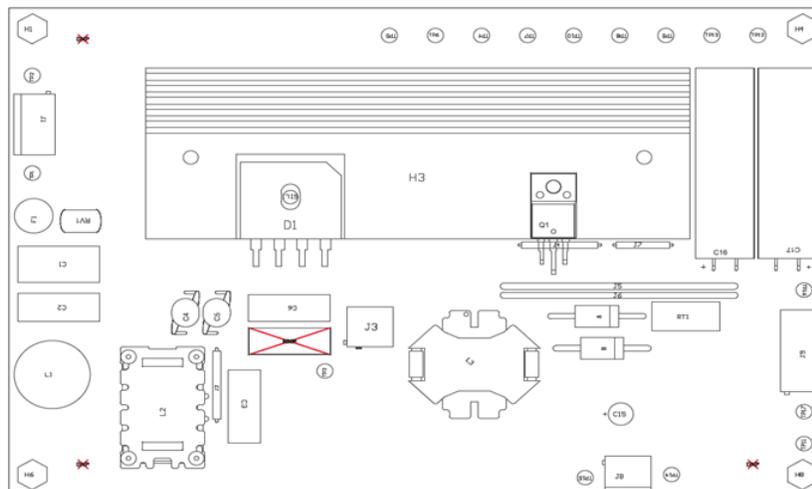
UCC28056BEVM-296 Top Assembly Drawing (Top view)
